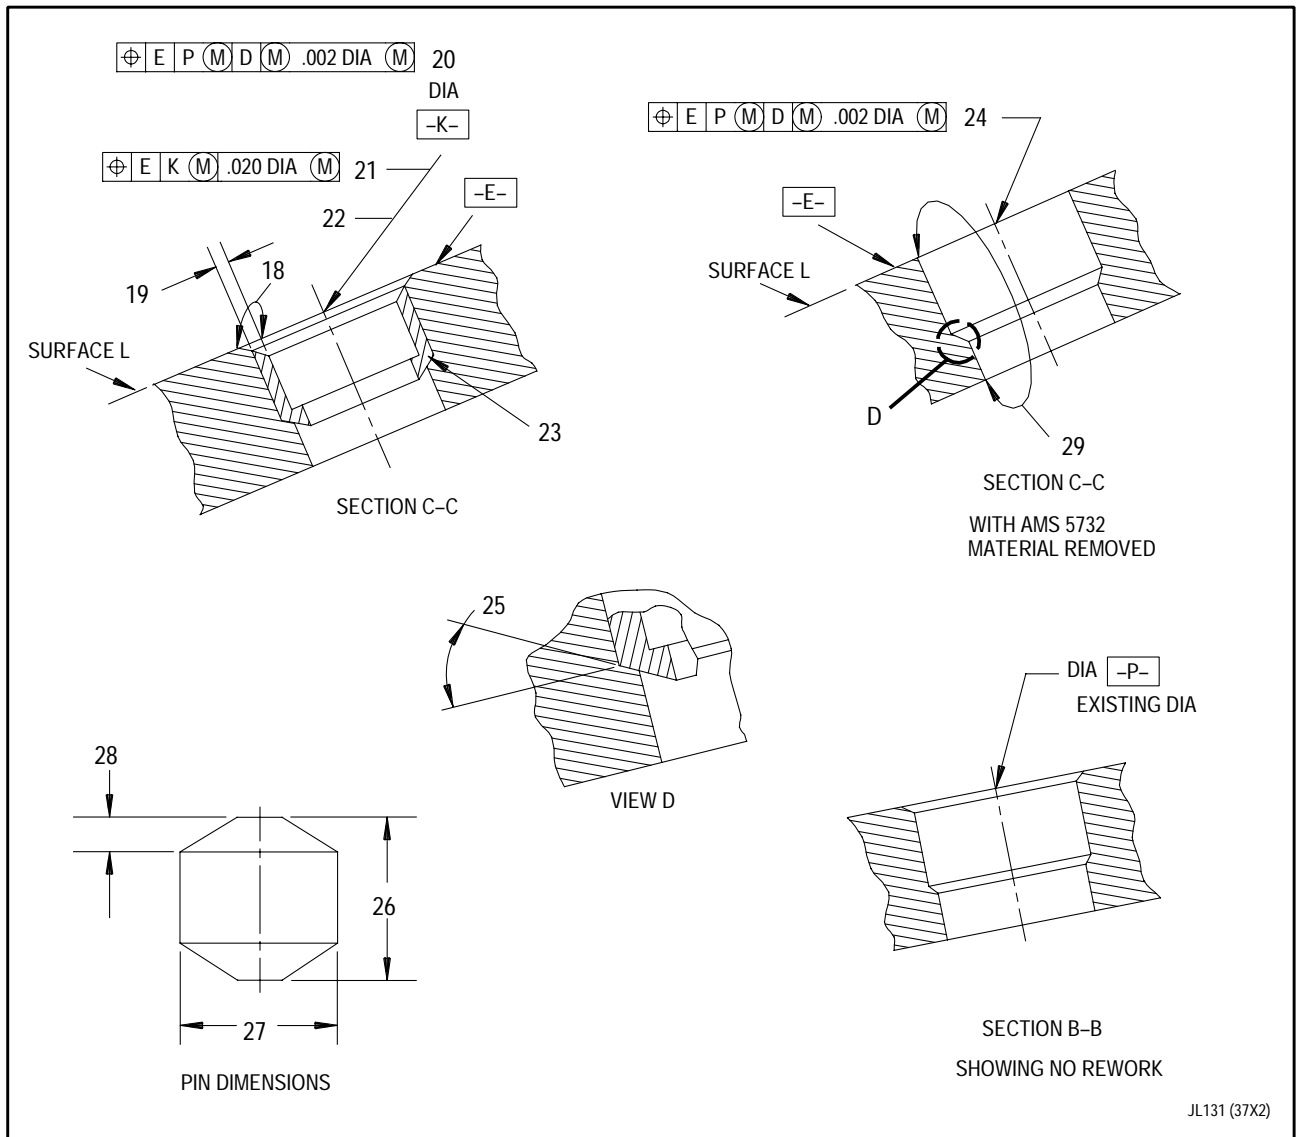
Gearbox (Front) Housing Assembly - Dowel Pin Holes Repair (Sheet 3 of 4)
